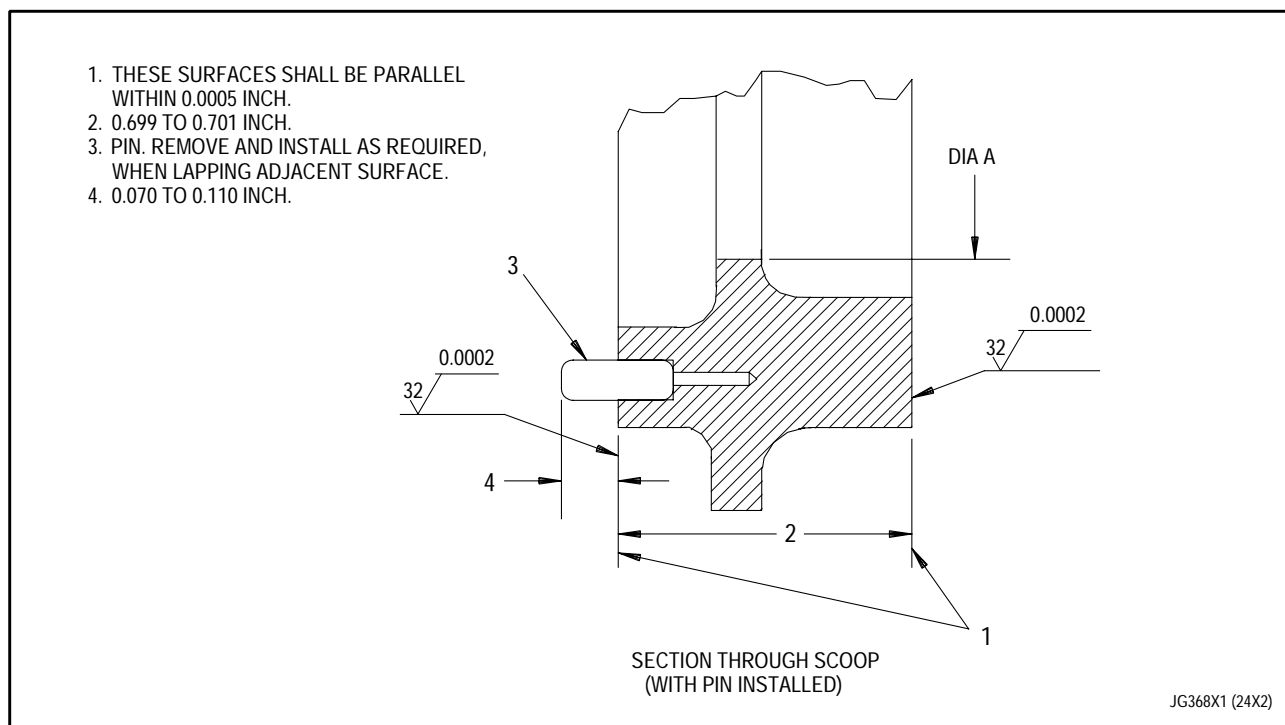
No. 2 Bearing Front Scoop Assembly - Lapping and Pin Replacement
